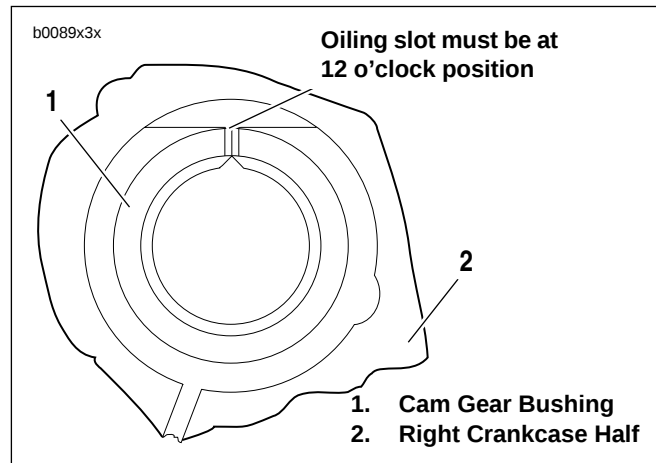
Cam Gear Bushing Installed in Crankcase
